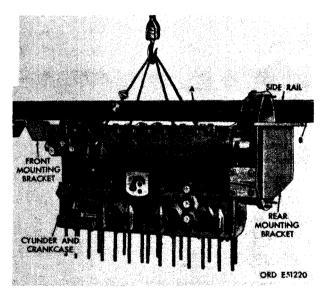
INSTALLING ENGINE MOUNTING BRACKETS AND LIFTING STRIPPED ENGINE FROM SUPPORT BLOCKS.
